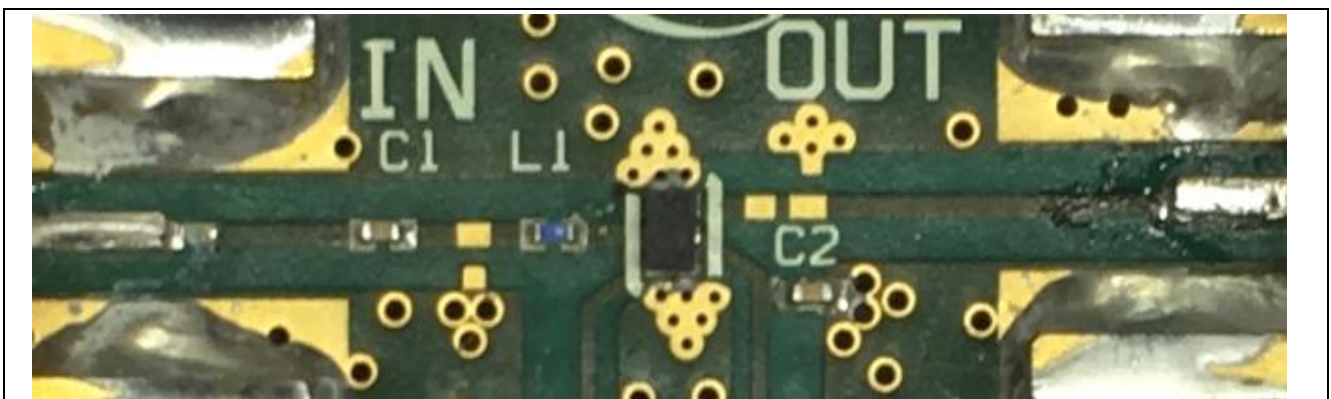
Photo Picture of the Evaluation Board (detailed view)
